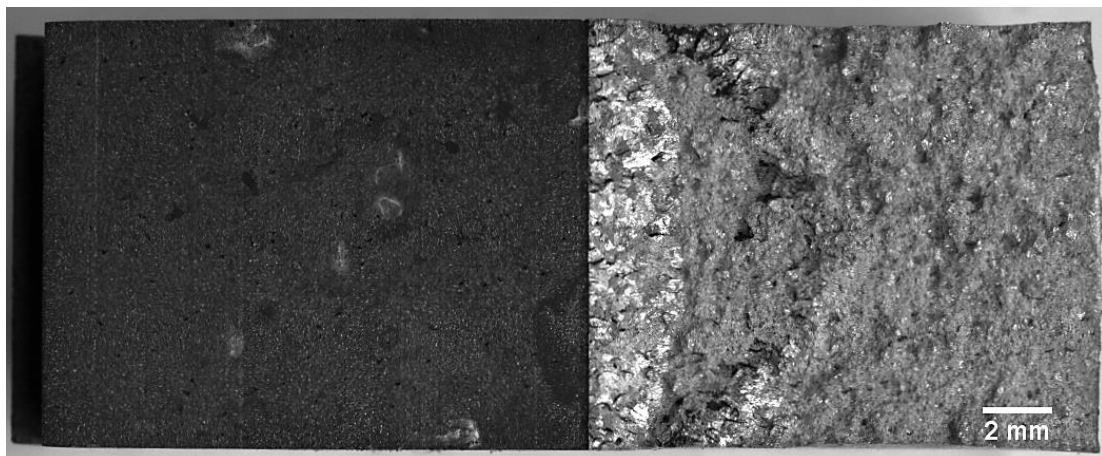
Fracture surface of Ref 4_155 C(T) specimen.
